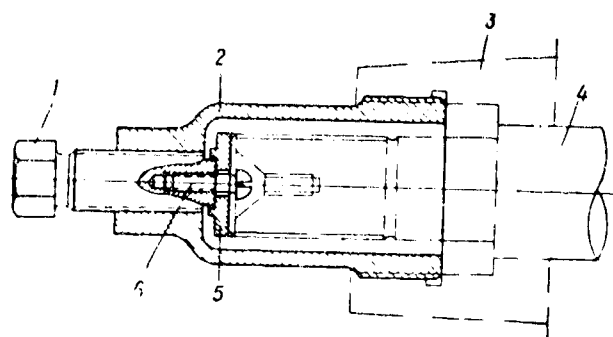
Removal of Propeller Screw with Sleeve (in presence of inside threading on end of propeller hub): 1 - grip bolt; 2 - sleeve (puller); 3 - propeller hub; 4 - propeller shaft; 5 - support washer; and 6 - mounting bolt.
